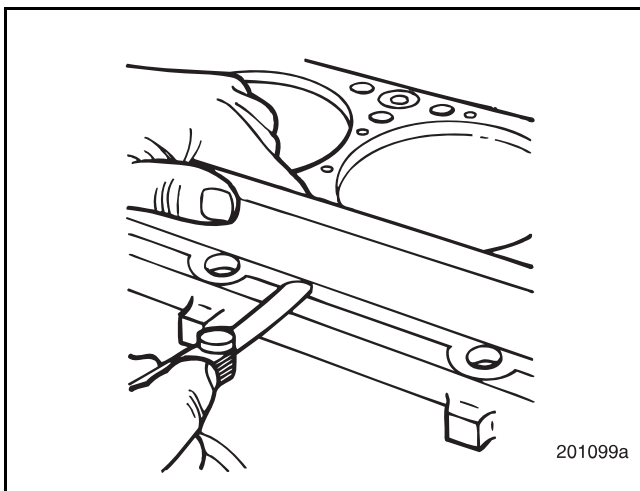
Checking Flatness of Cylinder Block Deck
